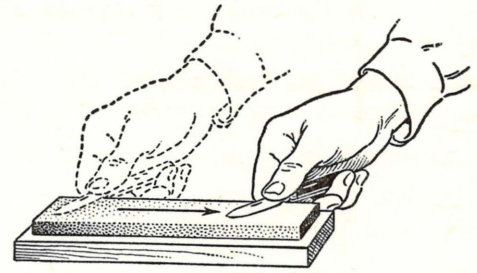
Hone a knife blade on an oilstone if a keen cutting edge is desired
